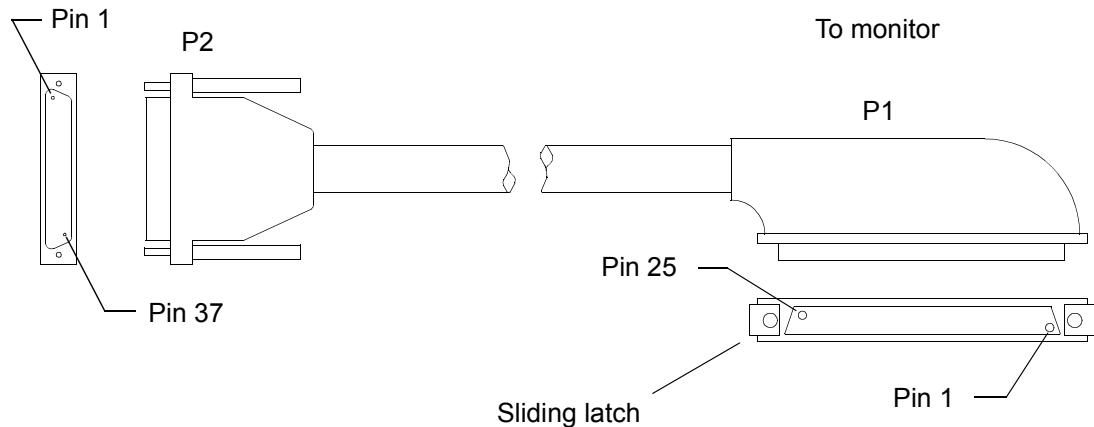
Monitor Lower Bezel Cable Assembly (P/N 3500-2614-XX)
